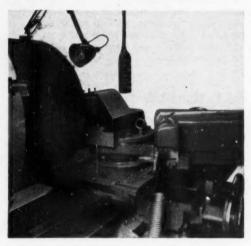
Close-up view of the hydraulic copying slide on the Denham profiling lathe
